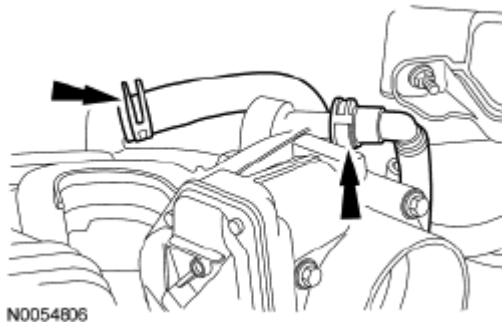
Locating Vacuum Hose & Evaporative Emission (EVAP) Tube
